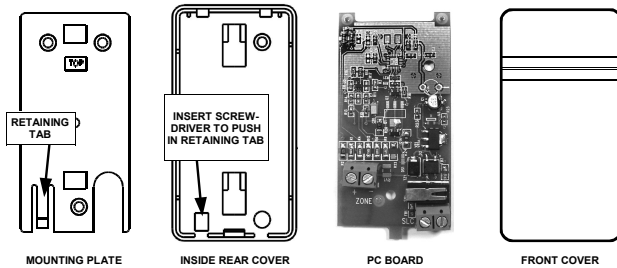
GEMC-BSLC-1PT Expansion Module Component Parts
